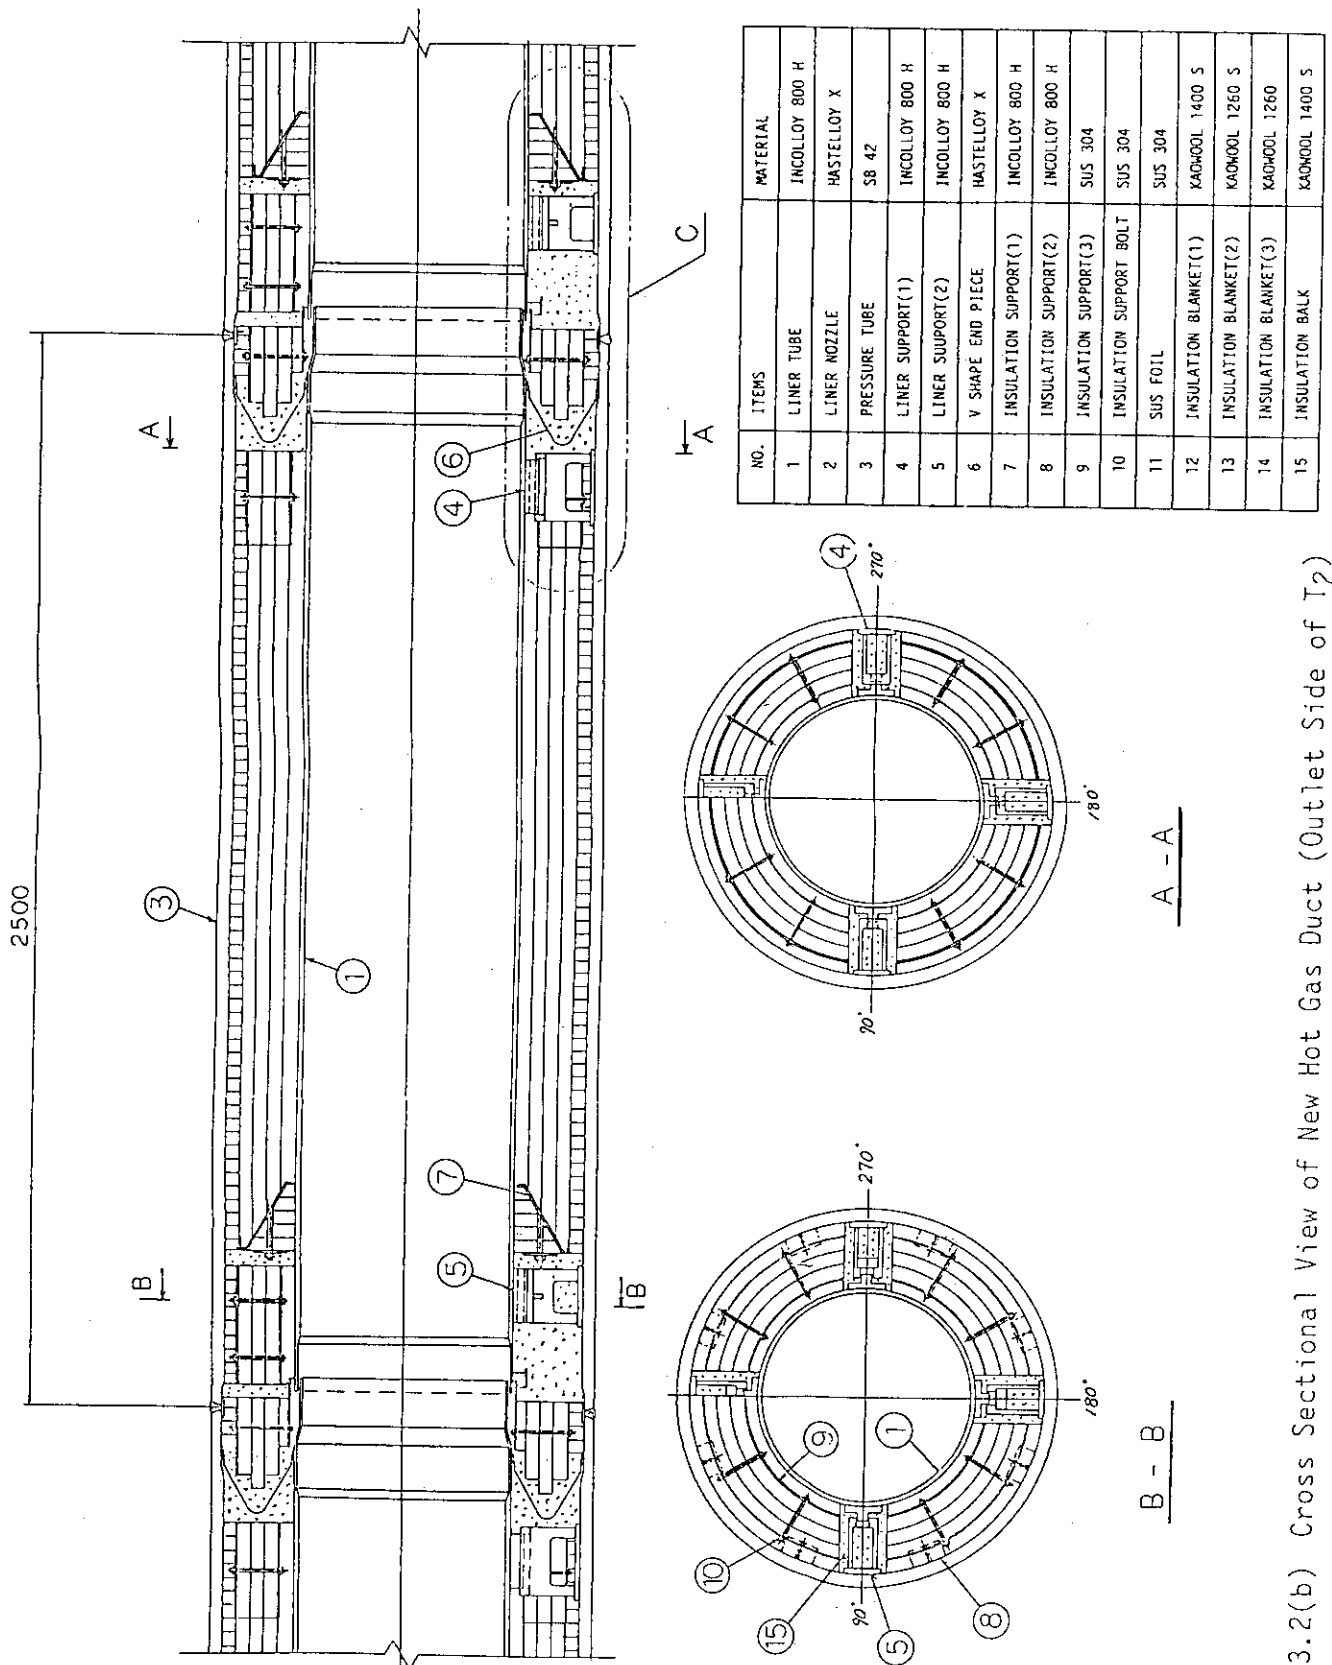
(b) Cross Sectional View of New Hot Gas Duct (Outlet Side of T2)
